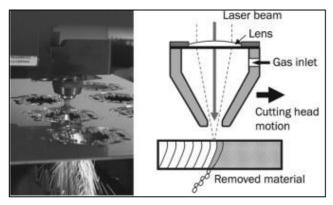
(a) Laser cutting of a stainless steel sheet; (b) scheme of a cutting head
